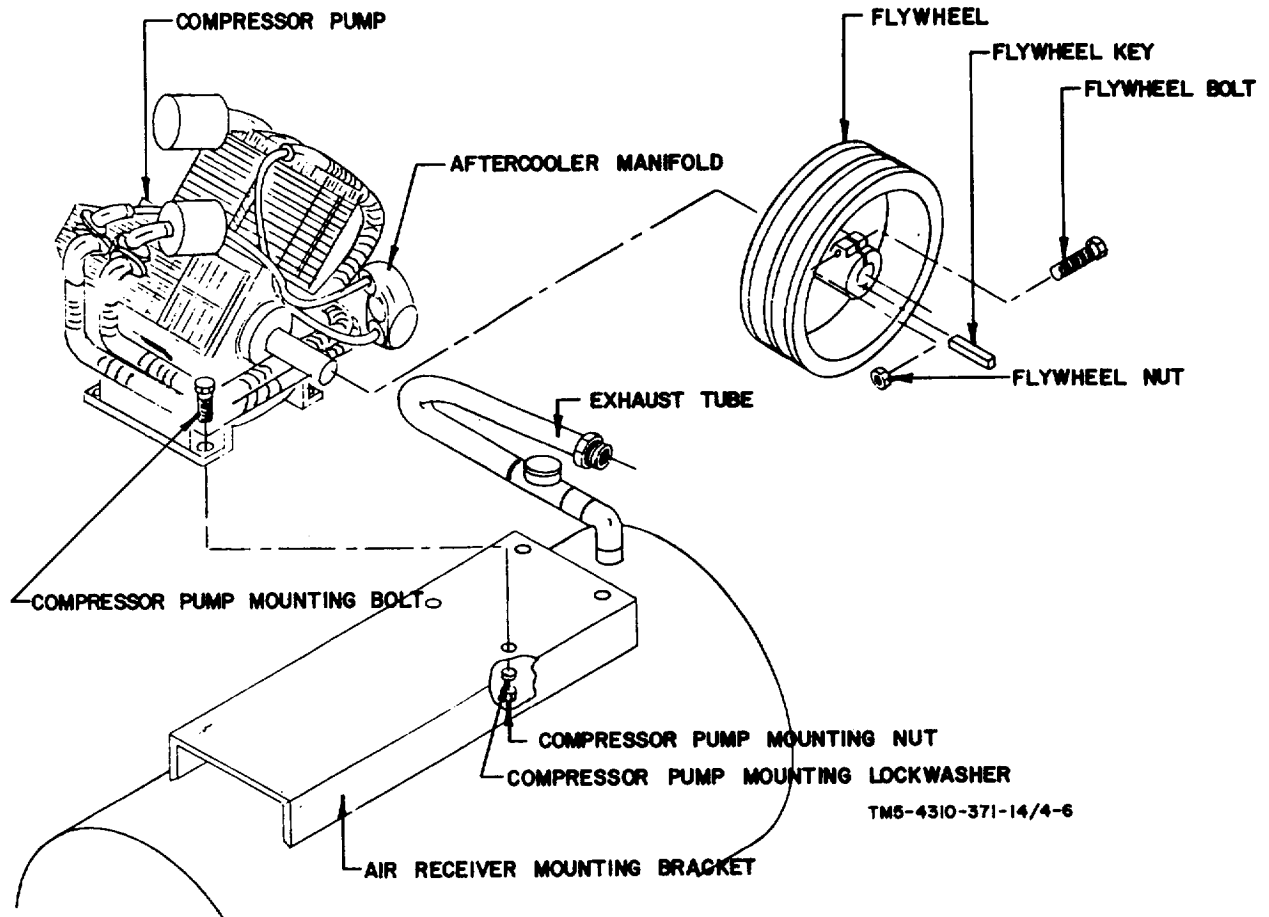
COMPRESSOR PUMP REMOVAL AND REPLACEMENT
